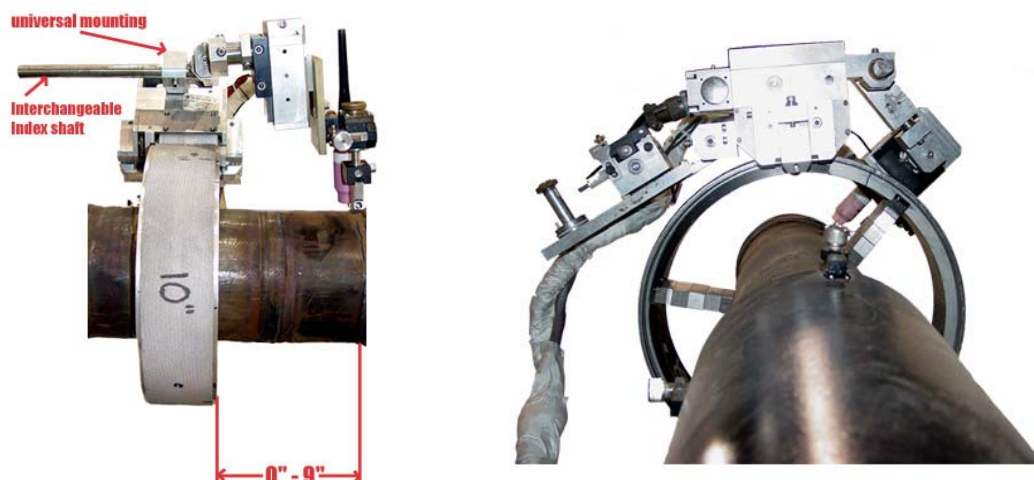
WSI mini-head mounted for an orbital Wweld on horizontal piping
